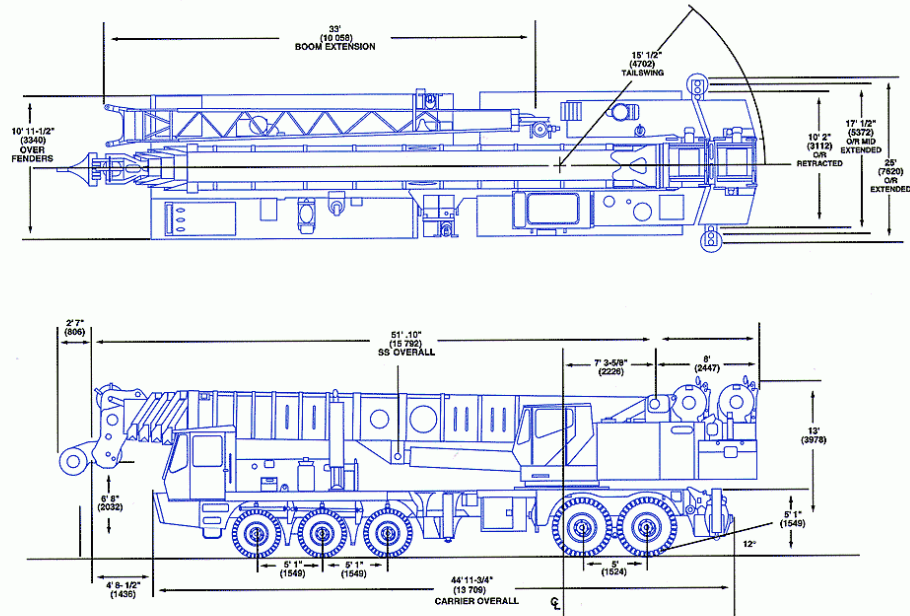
Grove TM9150 - 150-Ton Hydraulic Crane
